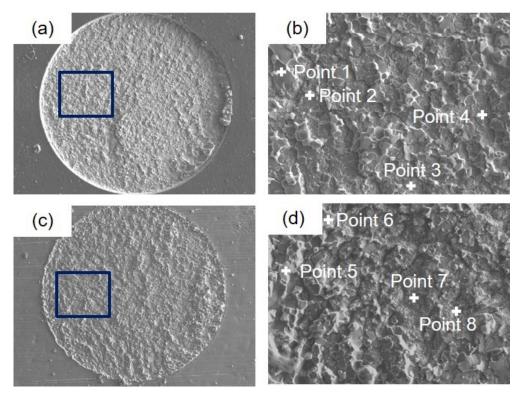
The top view of the impact fracture surfaces for the 1008 h aged solder bumps. (*a*, *b*) solder bump under a formic acid atmosphere; (*c*, *d*) solder bump using the RMA liquid flux.
